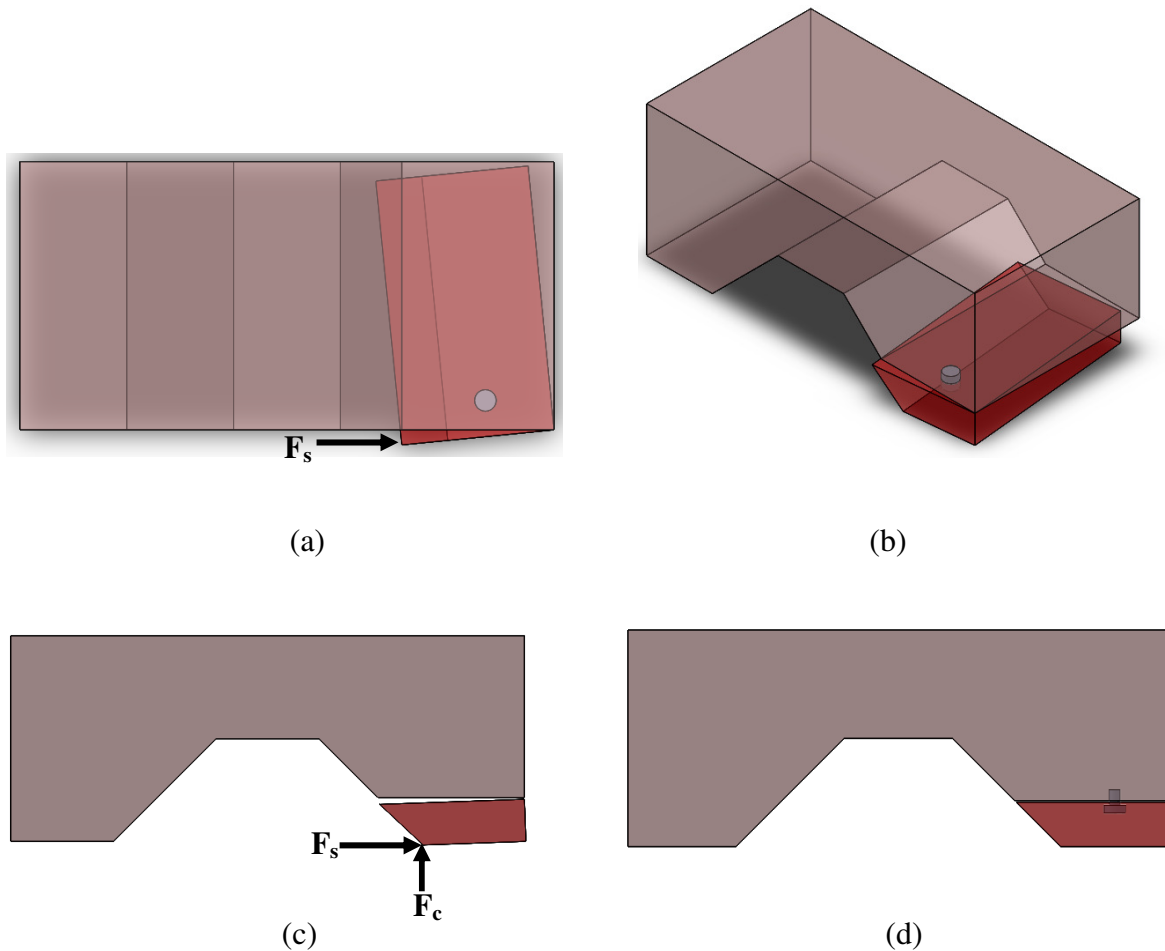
(a) Top view of die with translation rotation from only one pin, (b) isometric view of translation rotation, (c) front view of die with frontal rotation without joining, and (d) front view of frontal rotation with bolt
